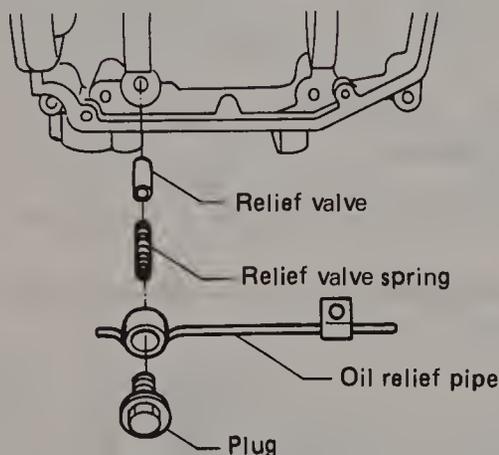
Remove the oil relief plug, oil relief pipe, relief valve spring and relief valve (Sec 5)
